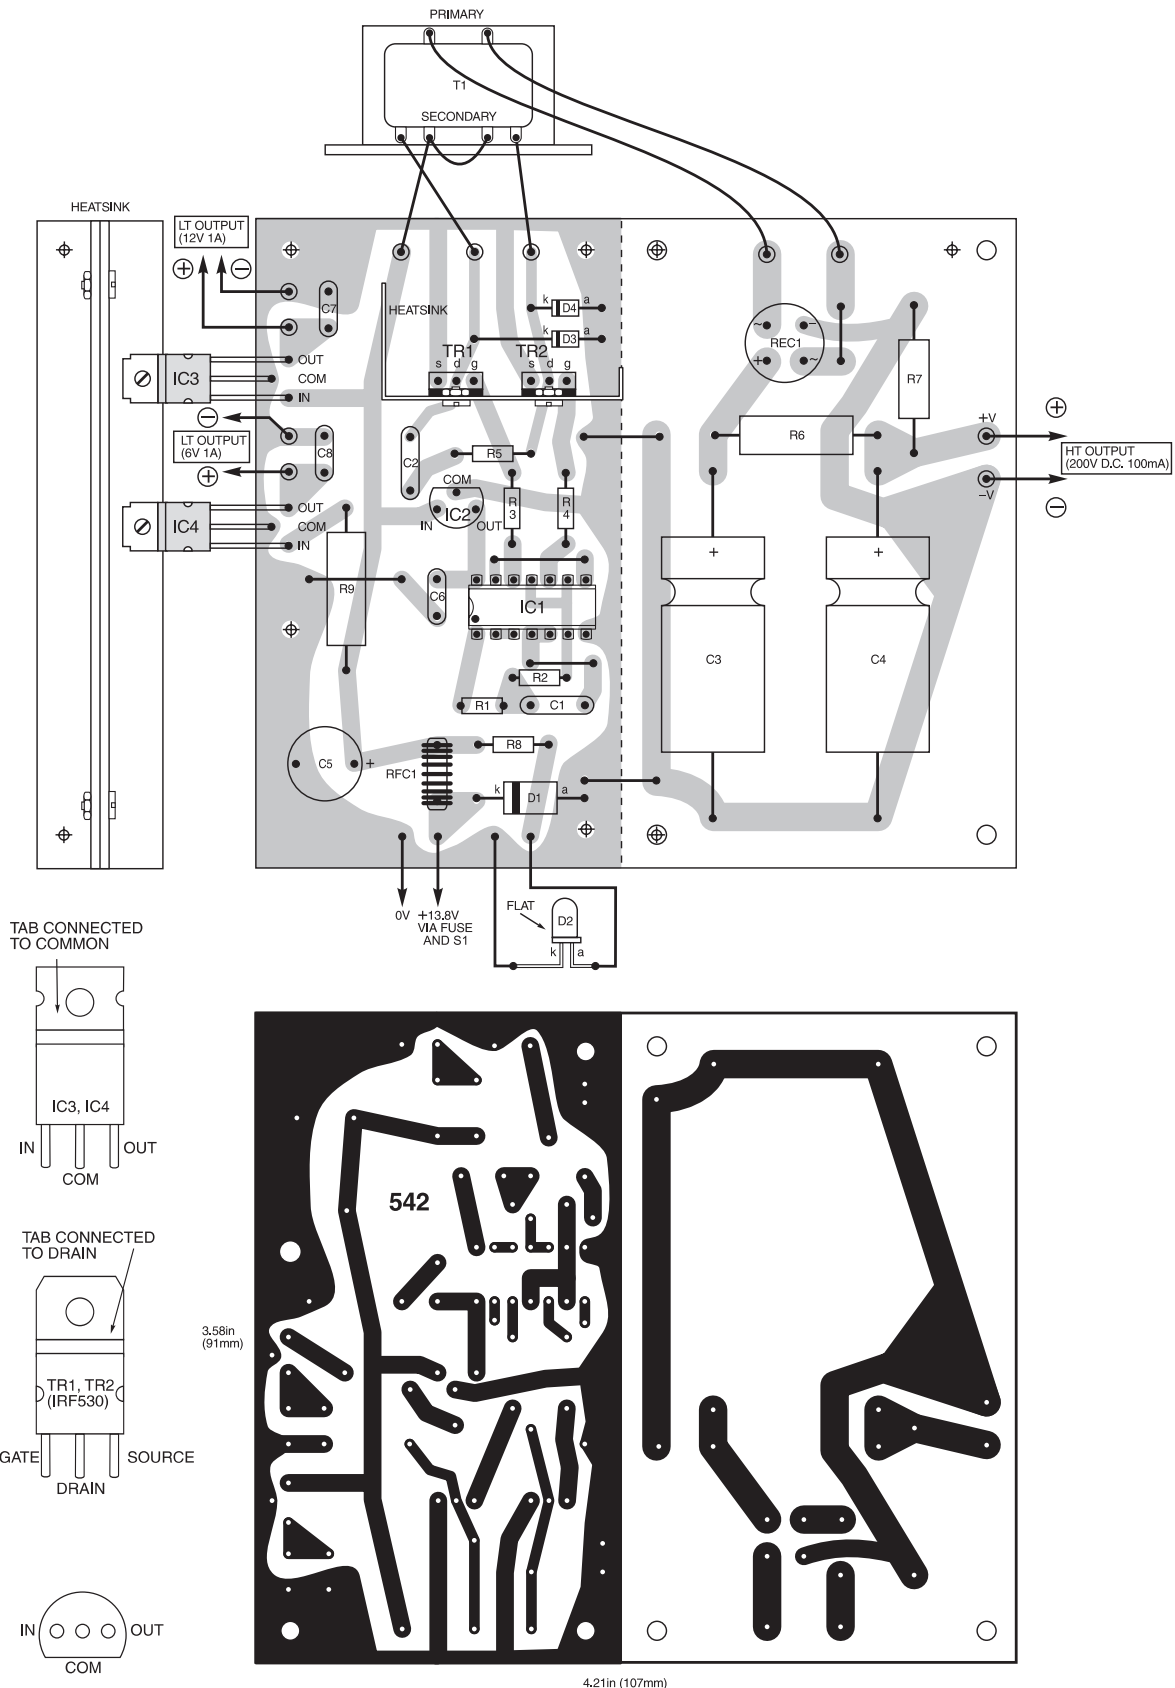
Printed circuit board component layout, wiring and full-size p.c.b. master for the Solid-State Valve PSU
